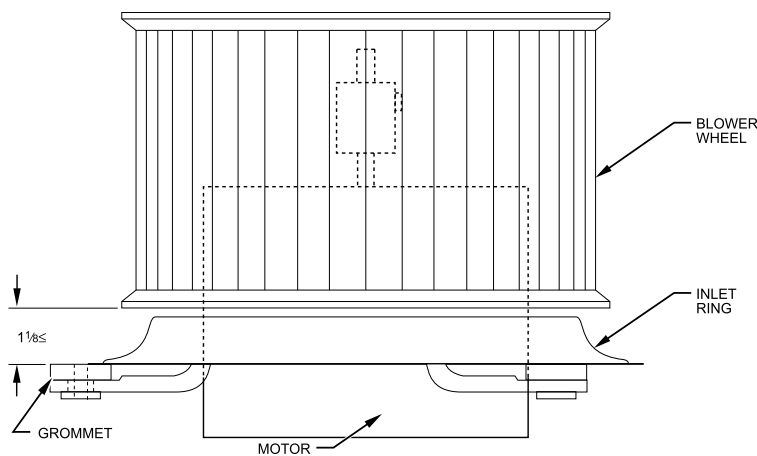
Motor, Inlet Ring, and Blower Wheel Assembly
